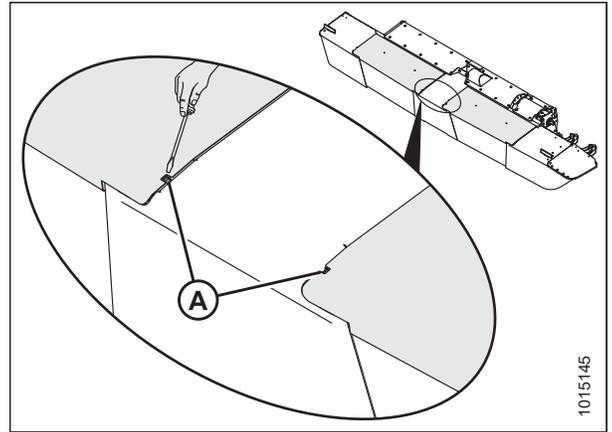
Cutterbar Door Latch Access Hole – Export Only
